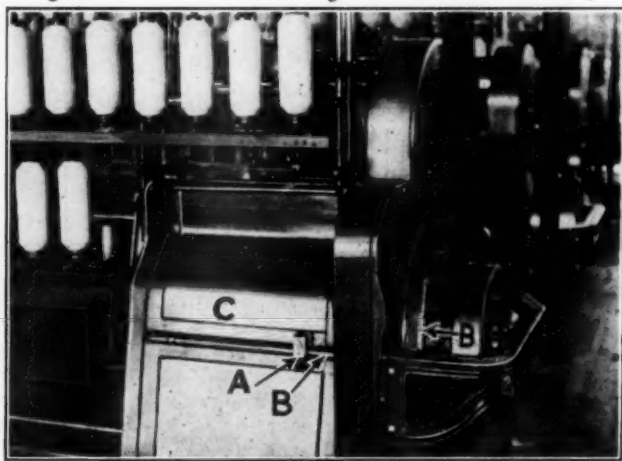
INTERLOCKING GUARD FOR HEAD GEARING OF ROVING FRAME
